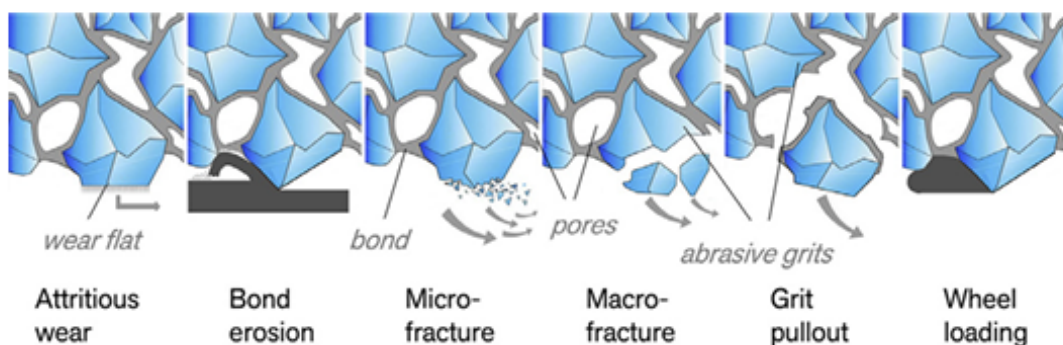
Fracture mechanism of grinding wheel by "Peter Krajnik et al." [6]
